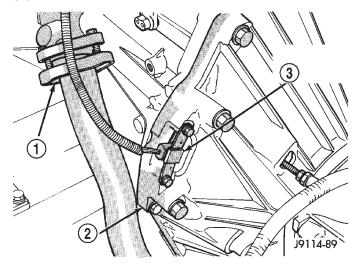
Crankshaft Position Sensor—2.5L Engine
